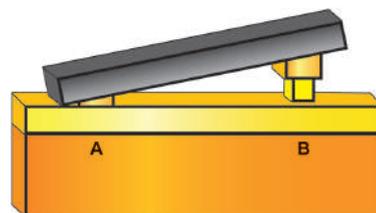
Another example of misalignment might create short circuits on side A, where excessive pressure compresses and spreads the bump material to adjacent pads, while the bumps on side B may still show acceptable bonds
